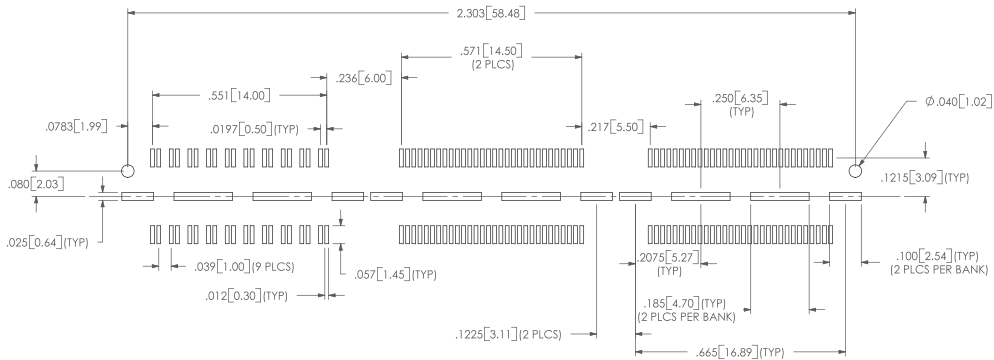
, Figure 2-4, and Figure 2-5 shows the front view, side section view, and PCB footprint of the Samtec ASP-122952-01.
